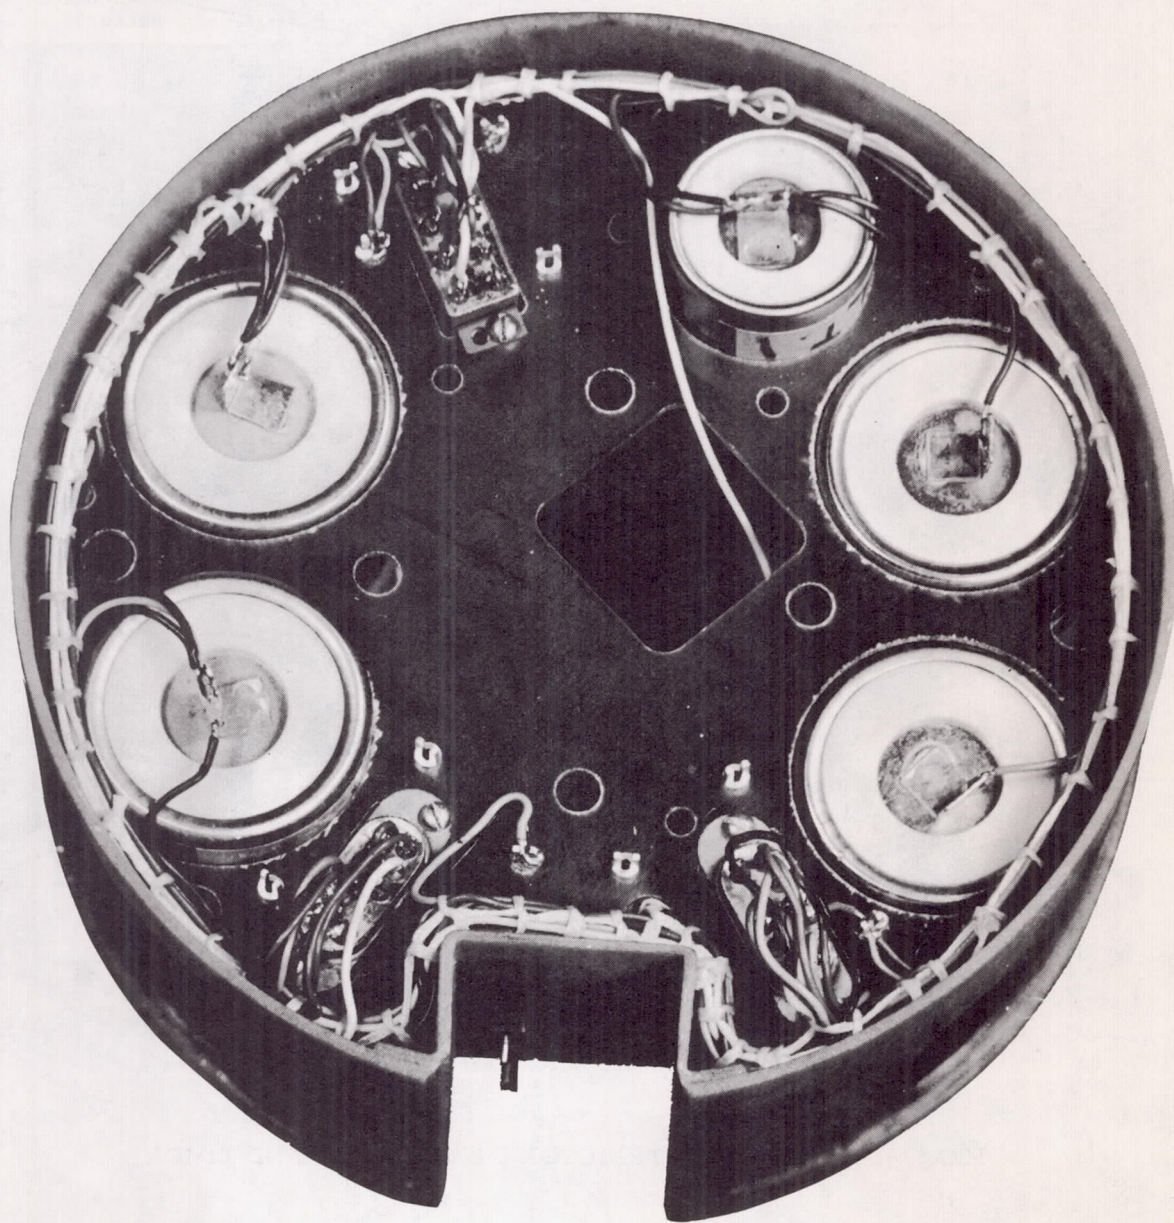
BATTERY DISTRIBUTOR ASSEMBLY
